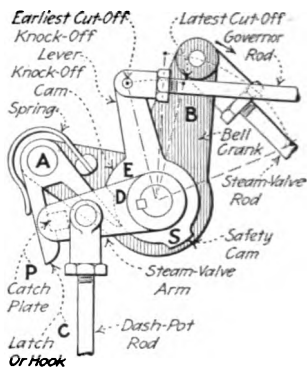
Front view of typical Corliss-valve releasing mechanism.
